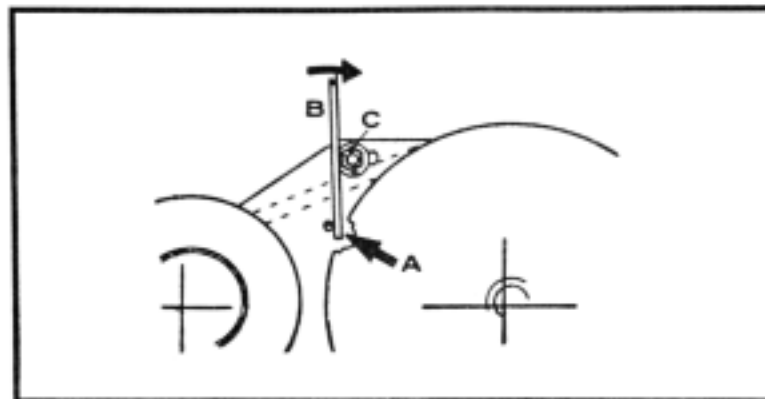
Batavus belts are adjusted with the help of a rod A and lever B.
